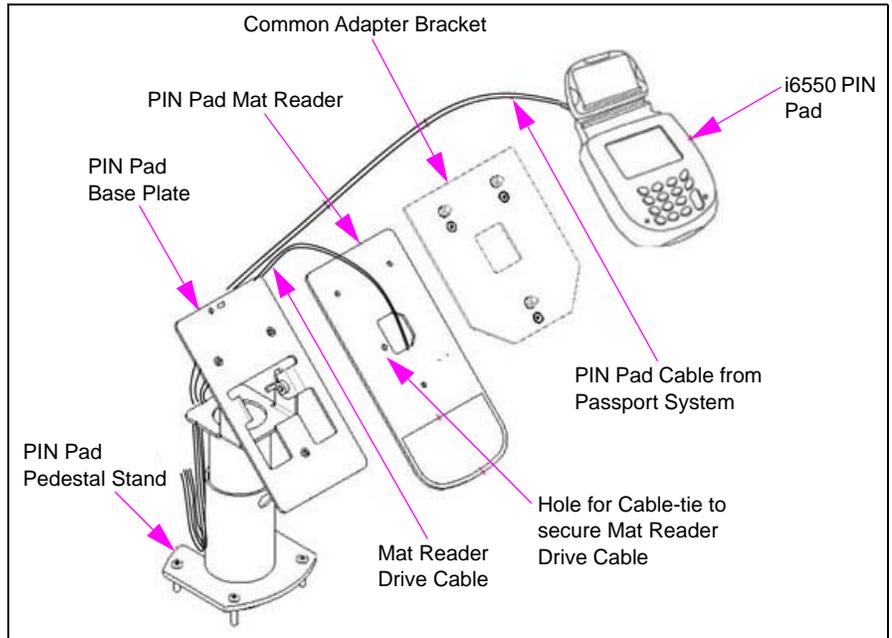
i6550 PIN Pad Mat Reader Assembly on Pedestal
